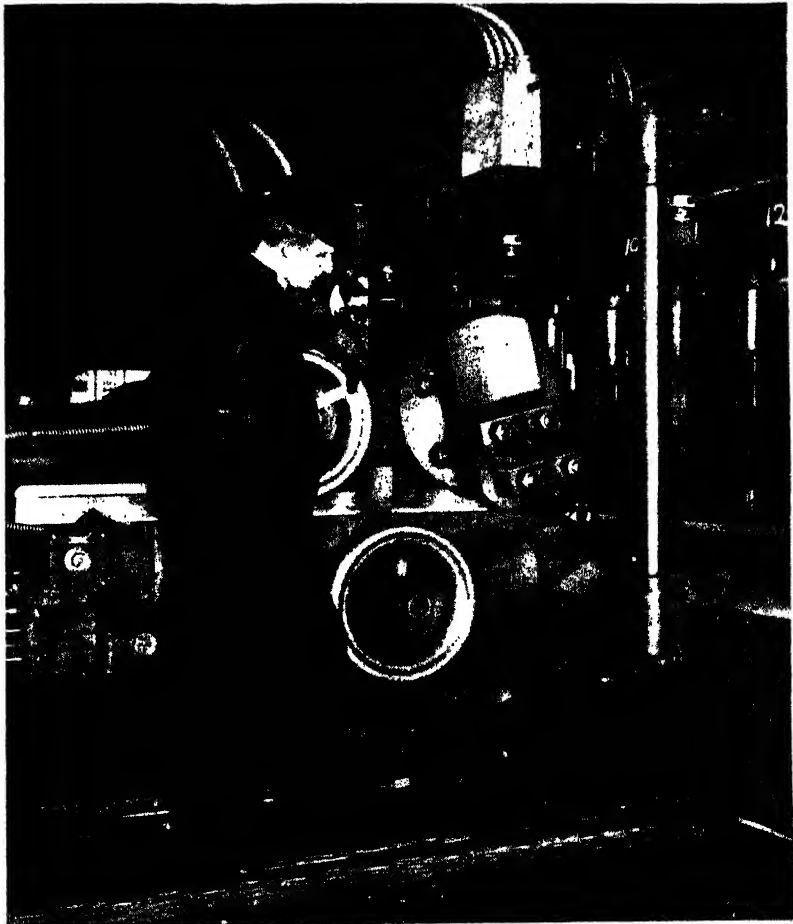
Planer Equipped with Radial Attachment having Two Cutters which Are Operated in Unison
